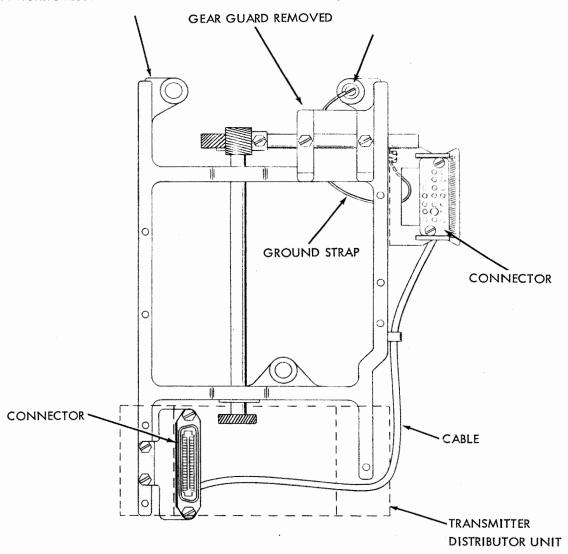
Transmitter Distributor Unit and Base Arrangement
